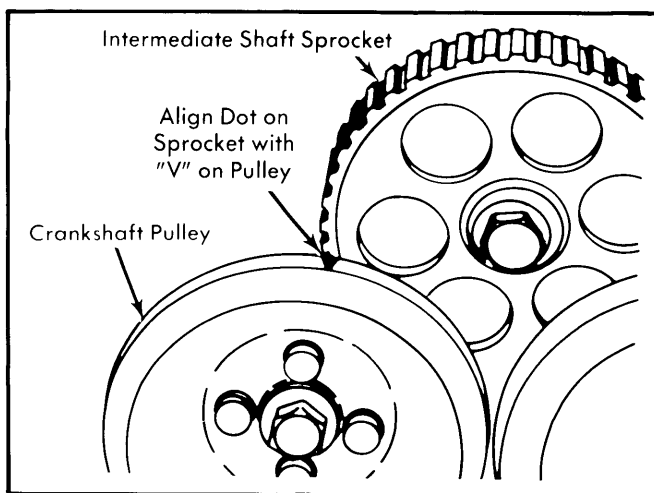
Crankshaft and Intermediate Shaft Index Marks Aligned with Notch on Crankshaft Pulley
